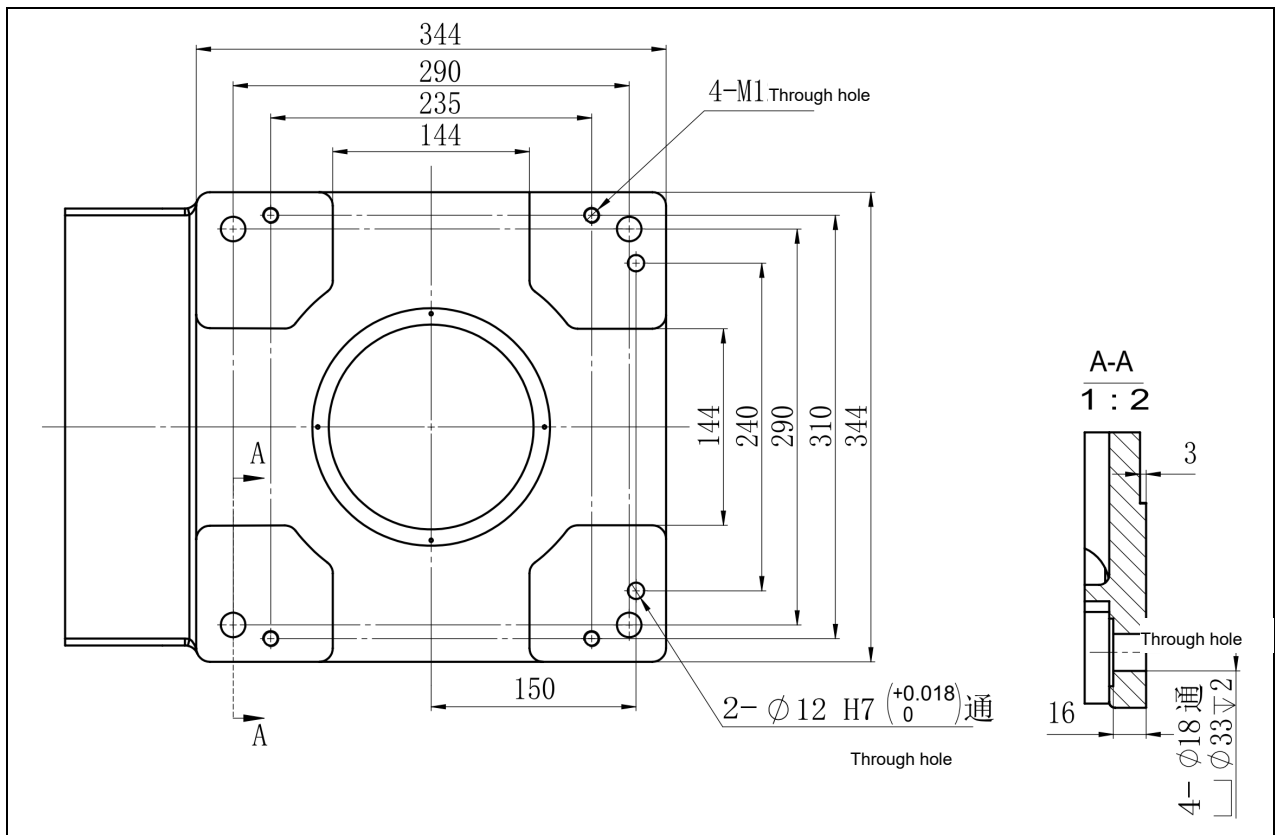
Robot base mounting dimension (ER12B-1510-LI, ER12B-1510)
